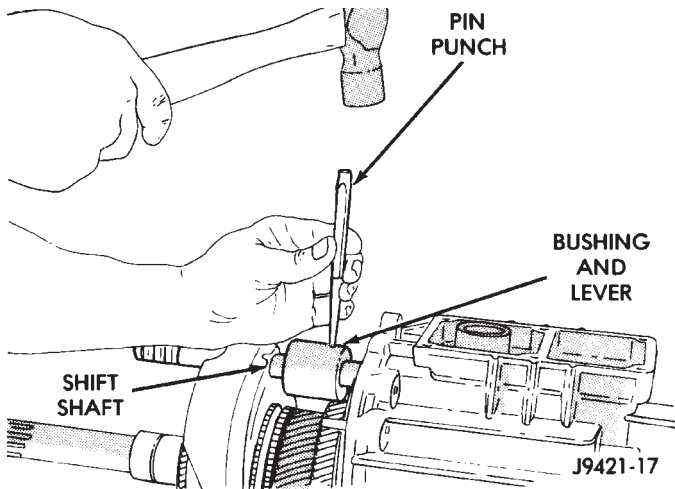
Removing Shift Shaft Lever And Bushing Roll Pin
